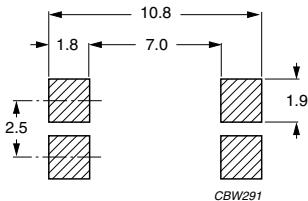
Solder lands for reflow soldering of CMS2-5.6/3/8.9.
